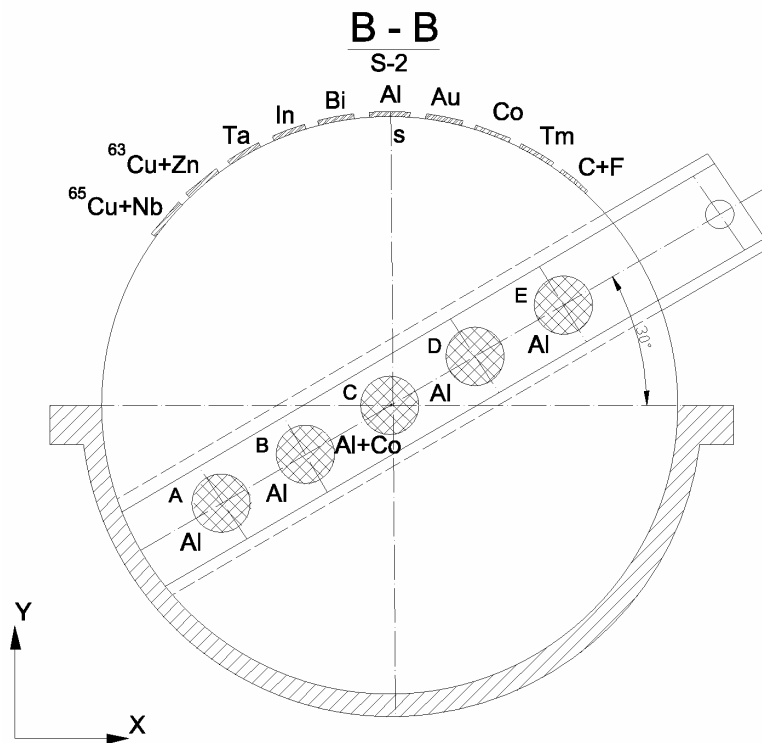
The B-B section of the target assembly view. Layout of the samples on the second disc.
